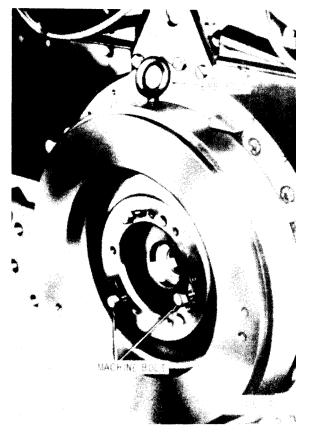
Removing flywheel, model AVDS-1790-2C and AVDS-1790-2D engines.
